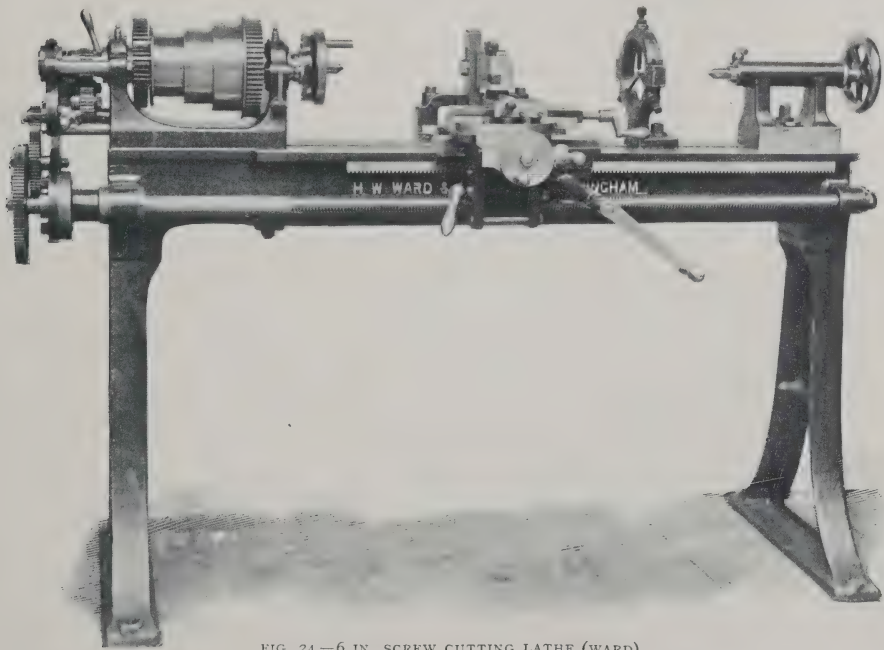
6 IN. SCREW CUTTING LATHE (WARD).
